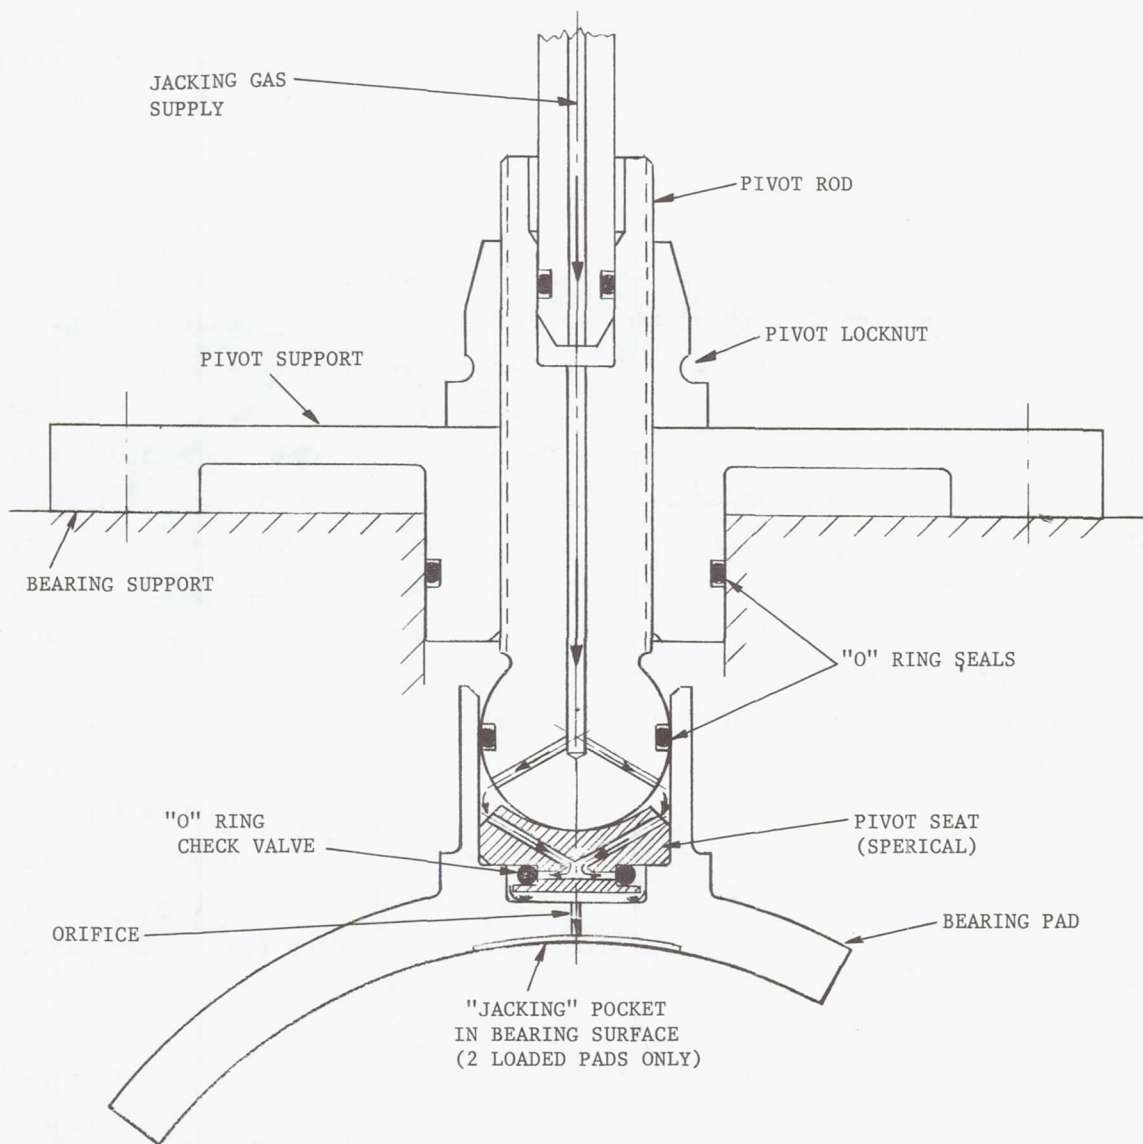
Details of the Journal Bearing Jacking Gas System
